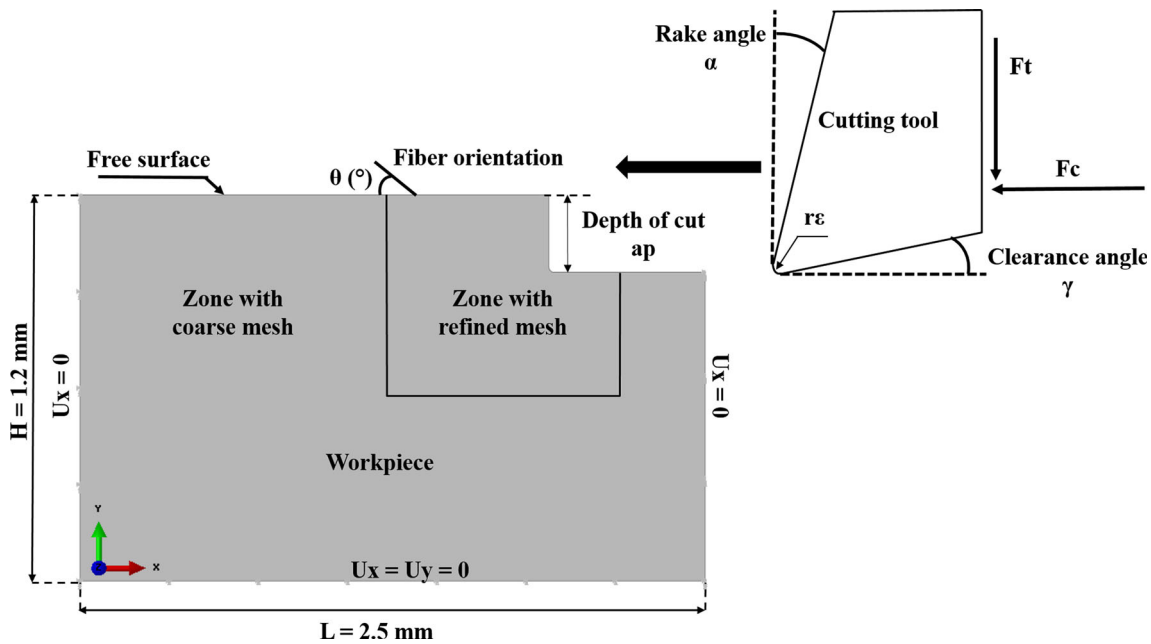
Boundary condition and dimensions of the workpiece and the cutting tool
